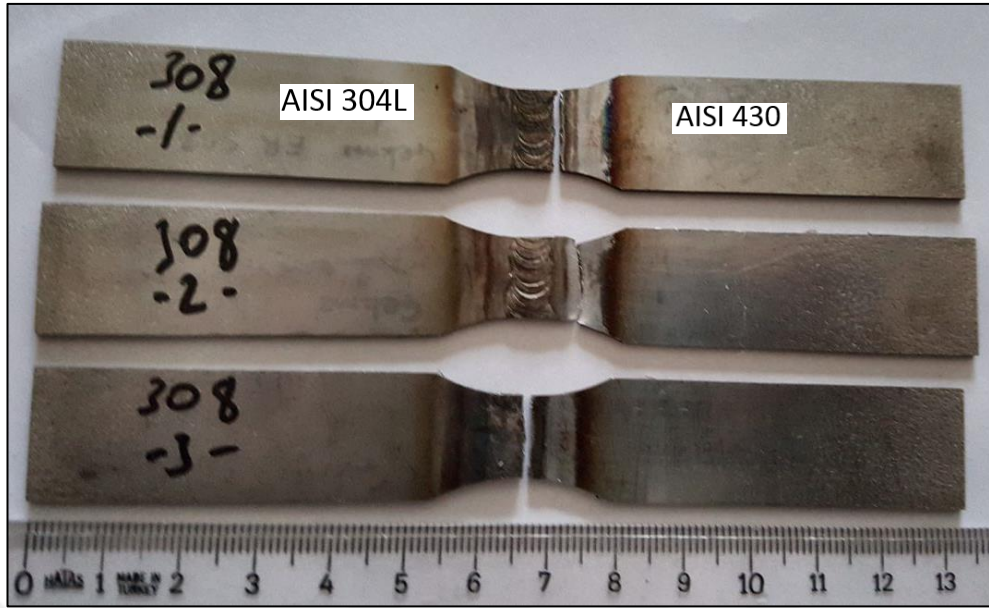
Macro photographs of the refraction areas of the Standard B welded tensile specimens combined with ER308 additional wire.
